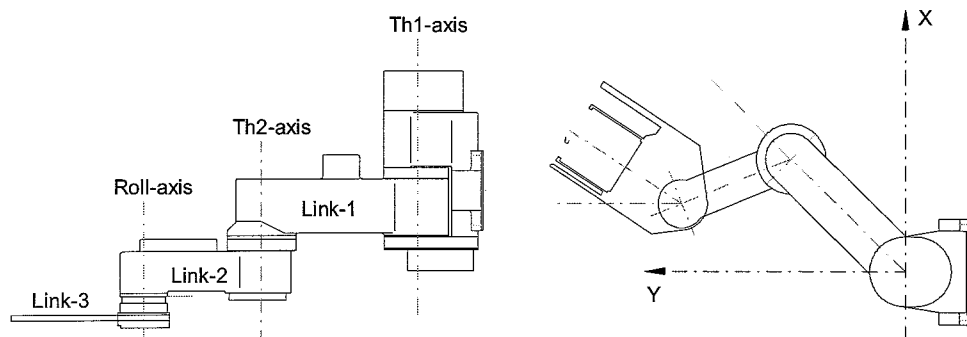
Schematic drawing of the robot, side view (left) and top view (right)
